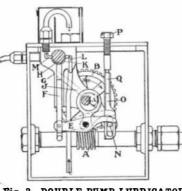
DOUBLE PUMP LUBRICATOR WITH ROTARY VALVE.
